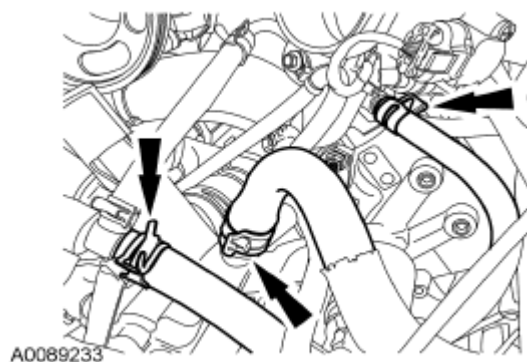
Locating Heater Hoses & Throttle Body Coolant Hose
